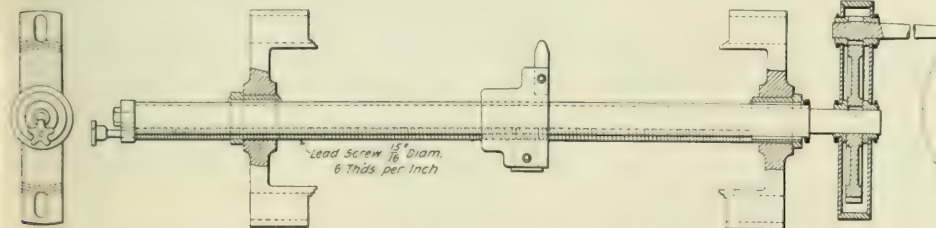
Boring Bar for Cylinders or Piston Valve Chambers.
